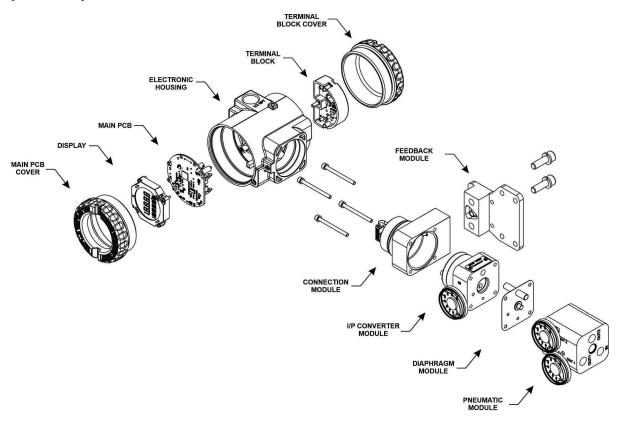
FY500 Digital Valve Positioner (Exploded View)
